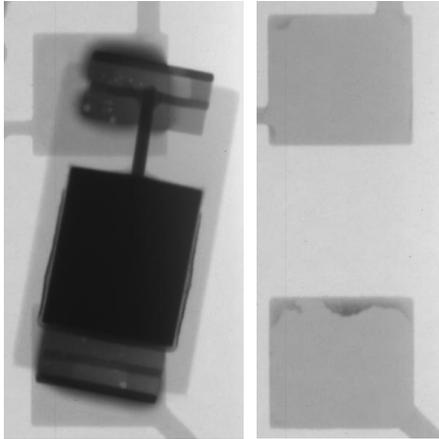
Left: X-Ray image showing poor solder wetting of a tantalum capacitor. Right: area where the capacitor has fallen. Most of the area of the pads is clear of solder.
